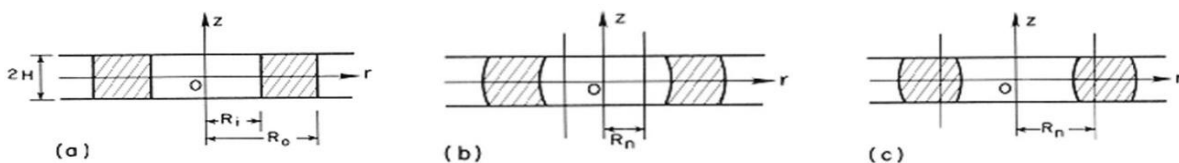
(a) specimen before ring test, (b) Specimen after ring test with lubrication, (c) Specimen after ring test without lubrication
